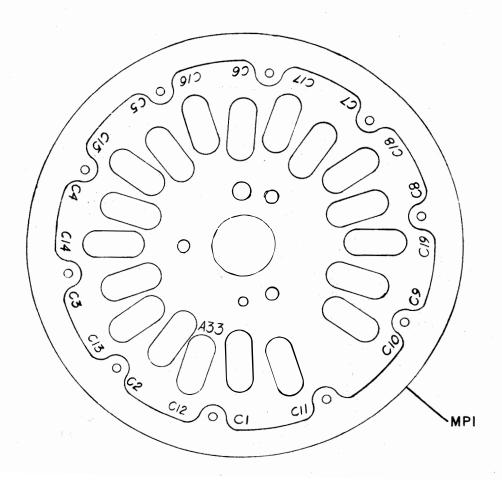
100 kHz Rotor Subassembly A2A4A33, Component Locations
